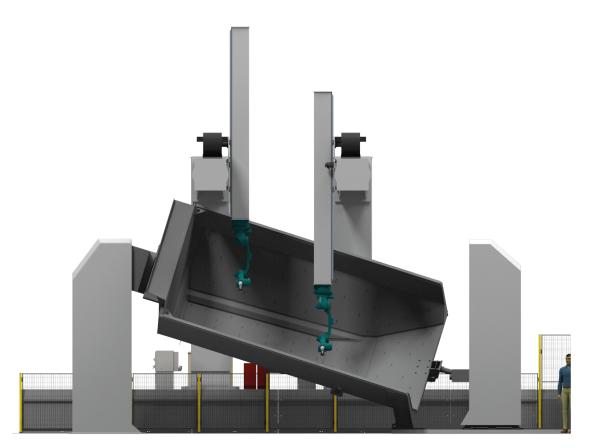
Front view of the production concept when welding a tilted and rotated hauler body.
